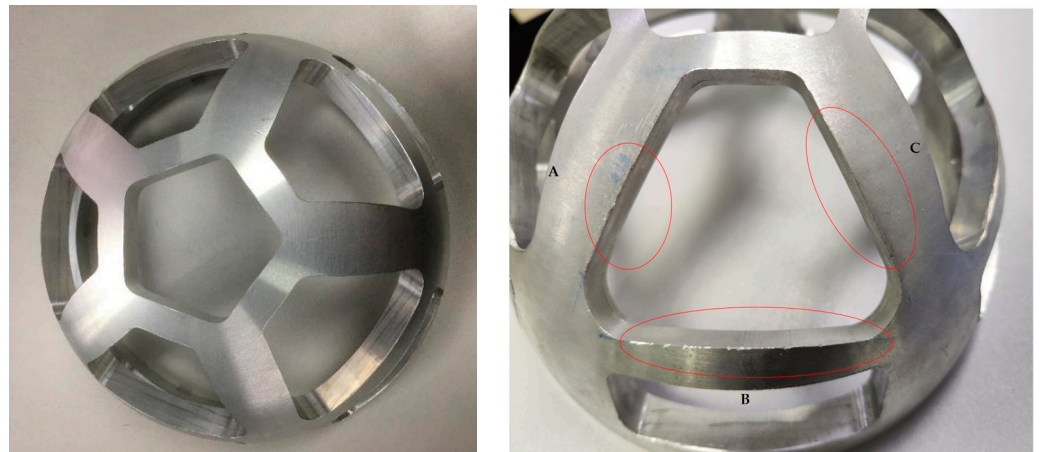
Complex-shaped casting class workpiece grinding analysis.
